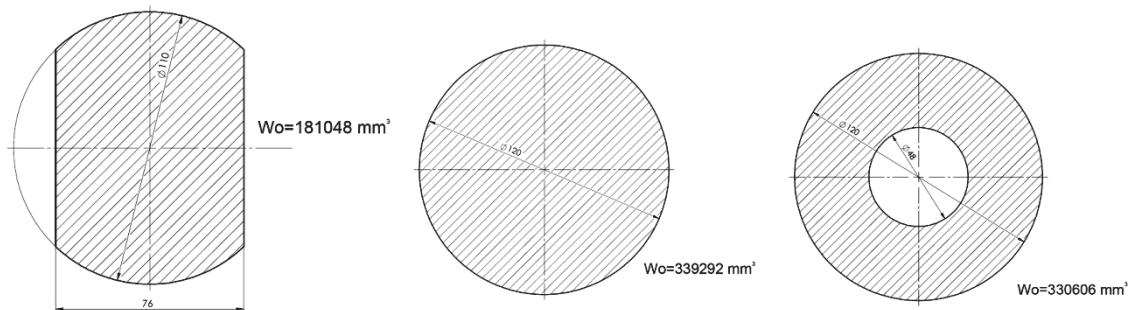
Elastic section modulus of the shaft (smallest cross-section, full cross-section- fracture location, weld cross-section)
